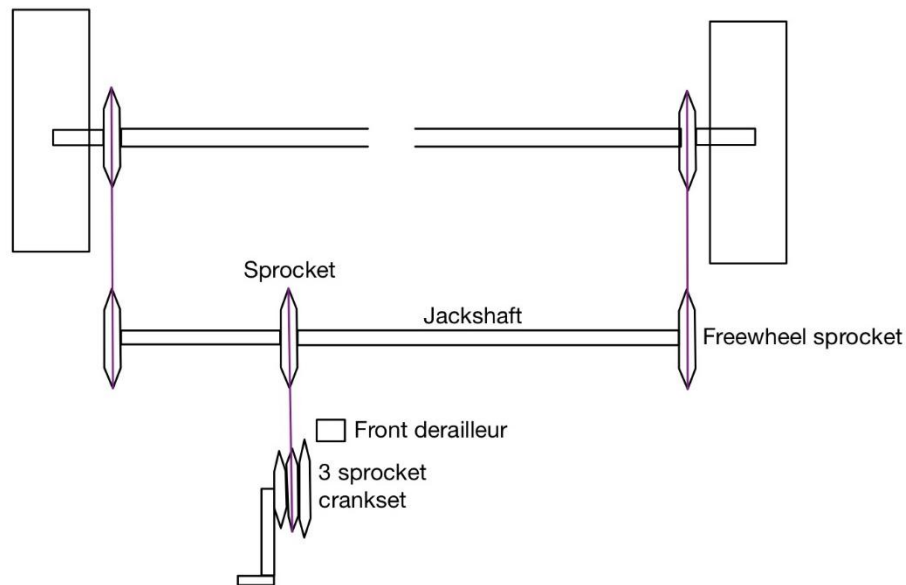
Sketch of the drivetrain layout for Concept 2: Front Derailleur Jackshaft Drive (Source: Author).
